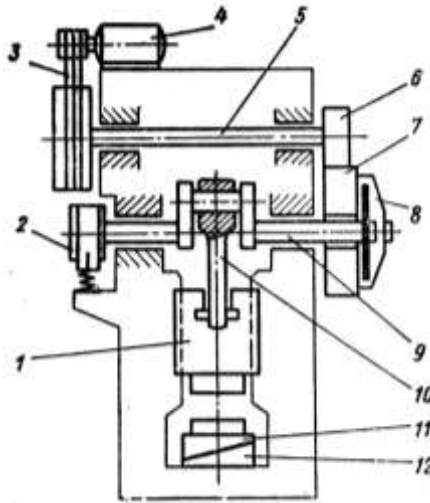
Kinematics scheme of a crank hot-forging press: 1- plunger; 2 – brake; 3 – belt transmission; 4 – electric motor; 5 – shaft; 6 – gear; 7 – gear; 8 – mult coupling; 9 – crank-shaft; 10 – lever; 11 – table of variable height; 12 – bas of the table
